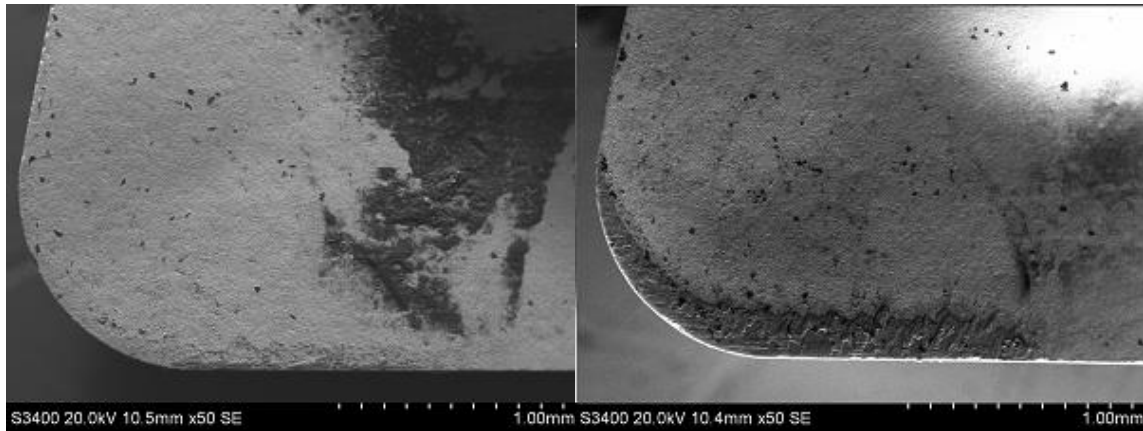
SEM images of cutting tool when cutting speed is 30m/min and feed rate is 0.05 mm/rev (left) and 0.15 mm/rev (right) after machining 30 cm<sup>3</sup>.
